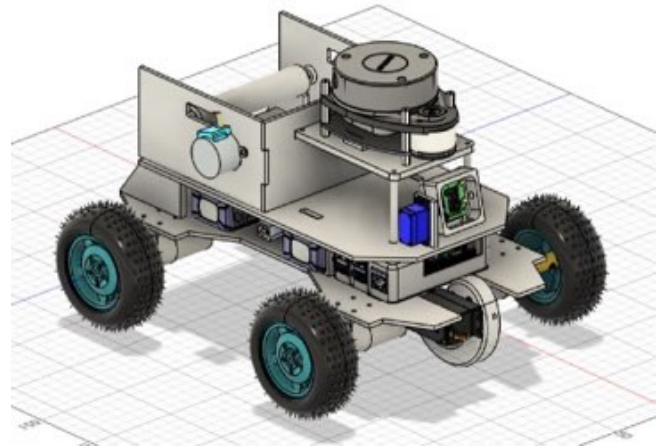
CAD MODEL OF THE ROBOT SHOWING MECHANICAL LAYOUT, CONVEYOR SYSTEM, AND LiDAR PLACEMENT.
